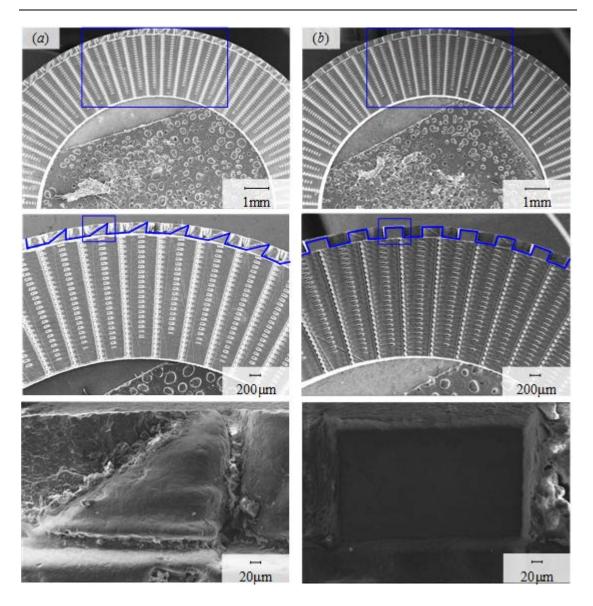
Topography of grinding wheel (a) I, and (b) II
